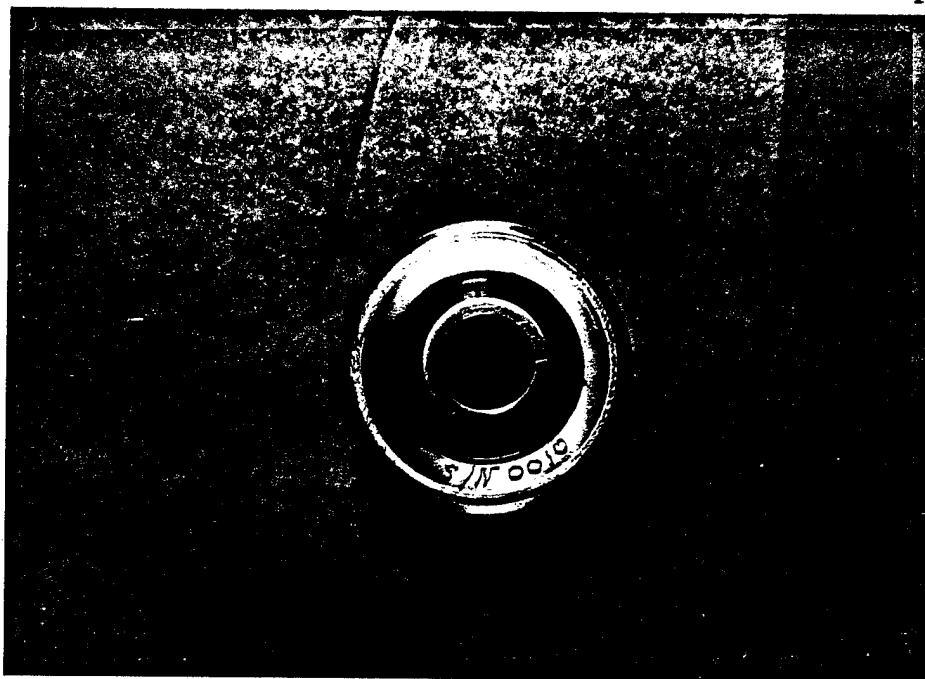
Typical Test Bearing Before Being Pressed Into Housing.
